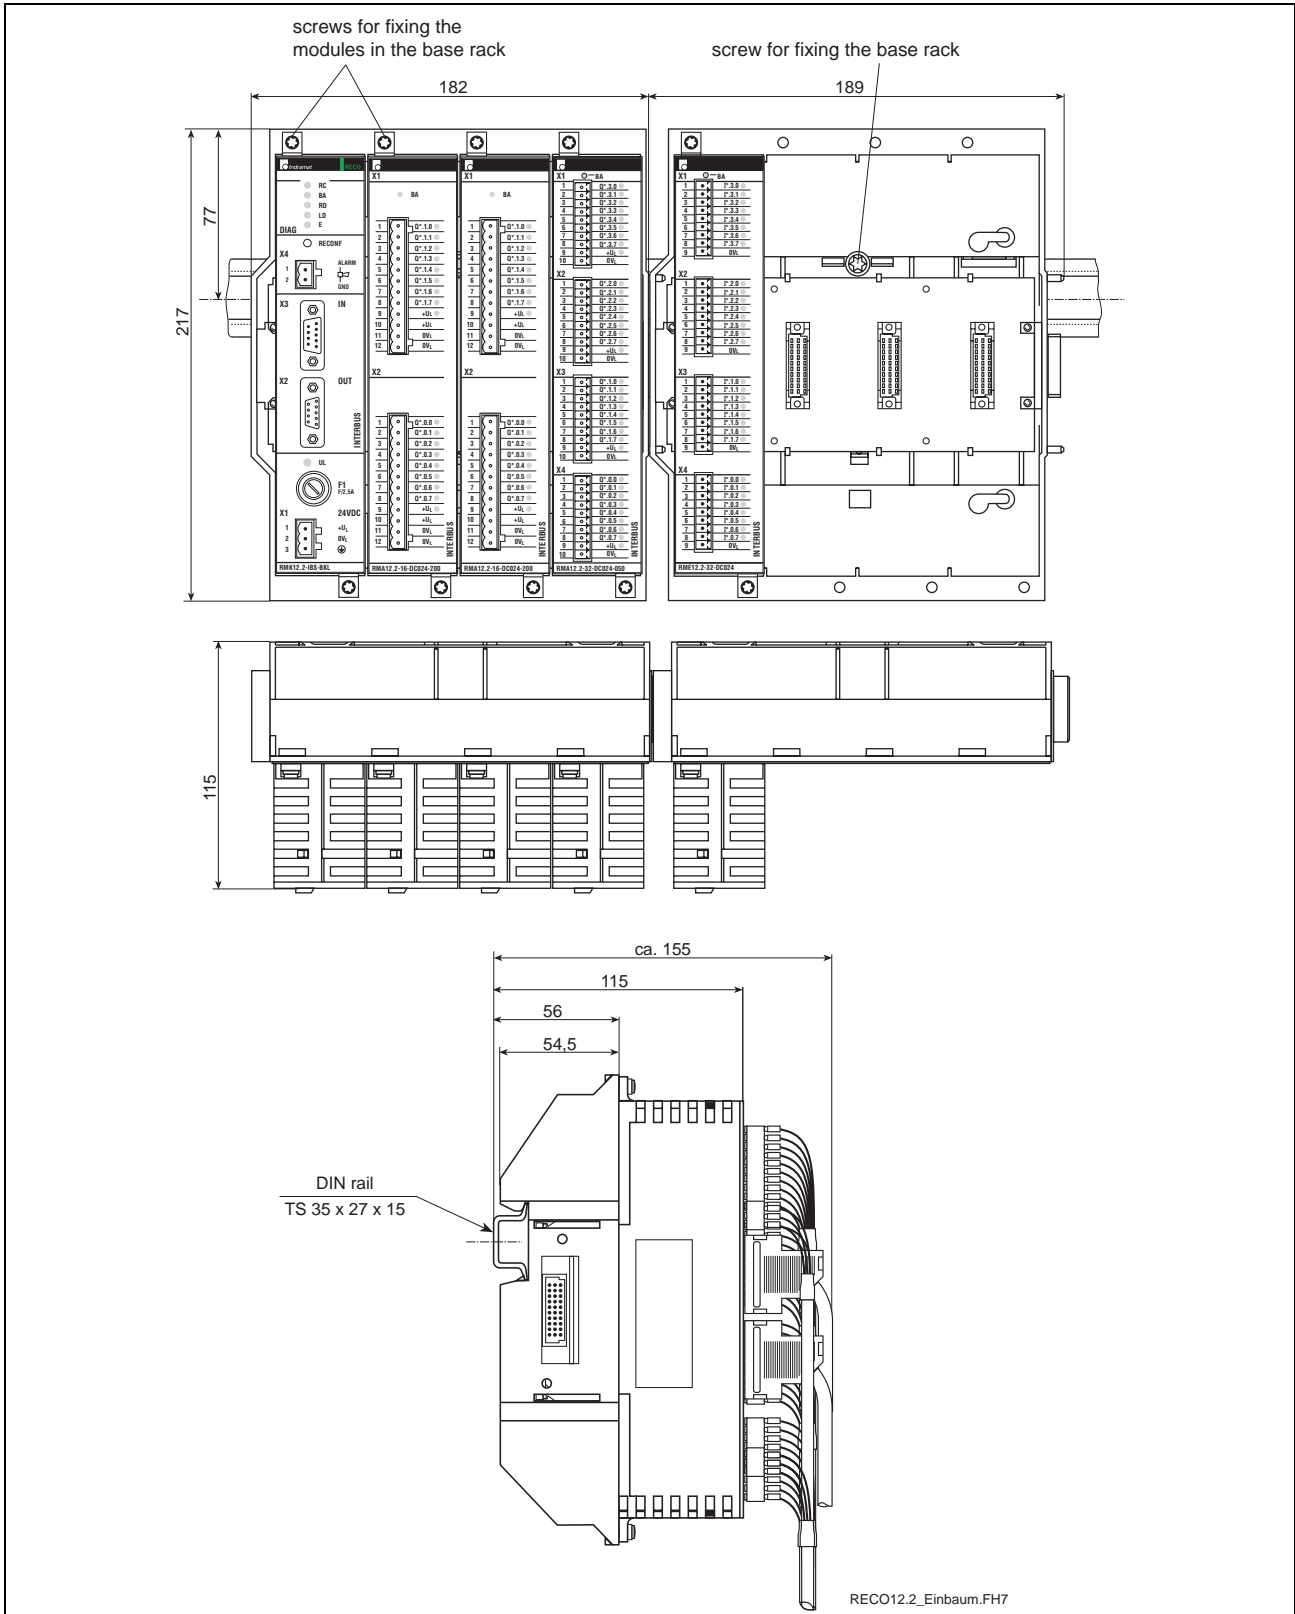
Mounting dimensions of the RECO12.2 unit
